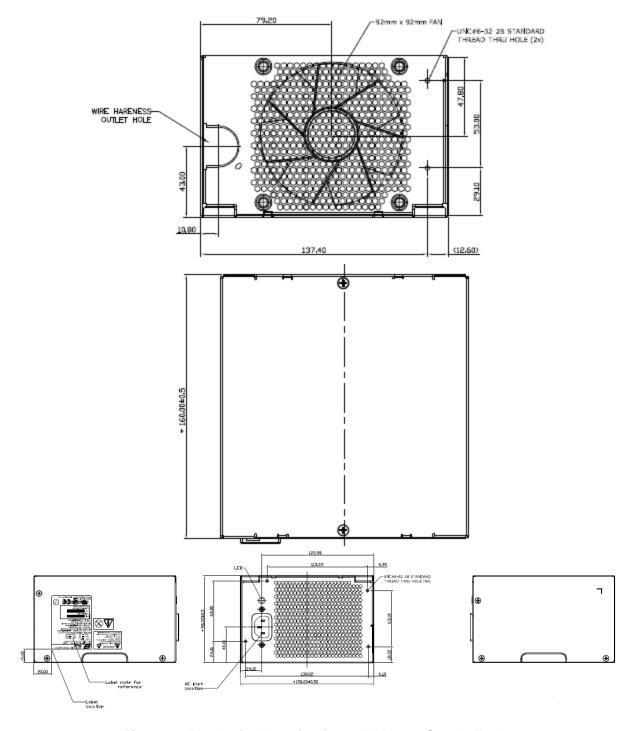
Mechanical Drawing for 365W Power Supply Enclosure
